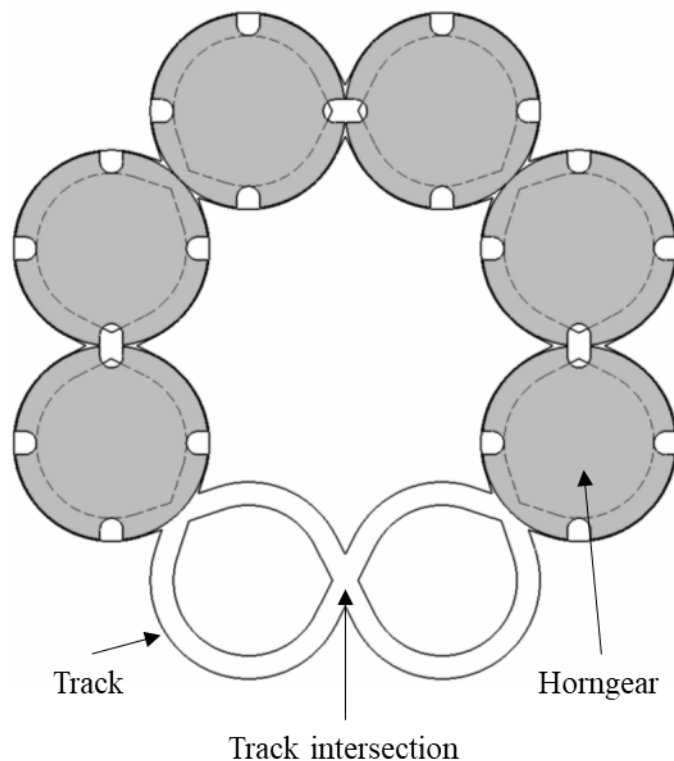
Top view of a maypole braiding machine bedplate composed of 8 horgears. Only six horgears are shown to visualize a track intersection
